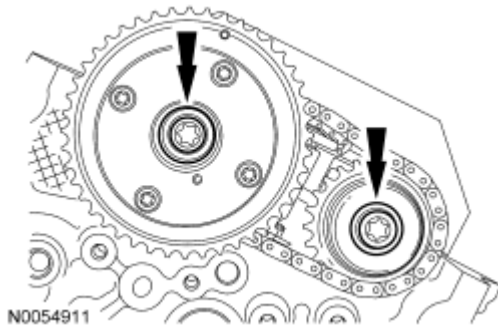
Locating LH VCT Assembly Bolt & LH Exhaust Camshaft Sprocket Bolt
